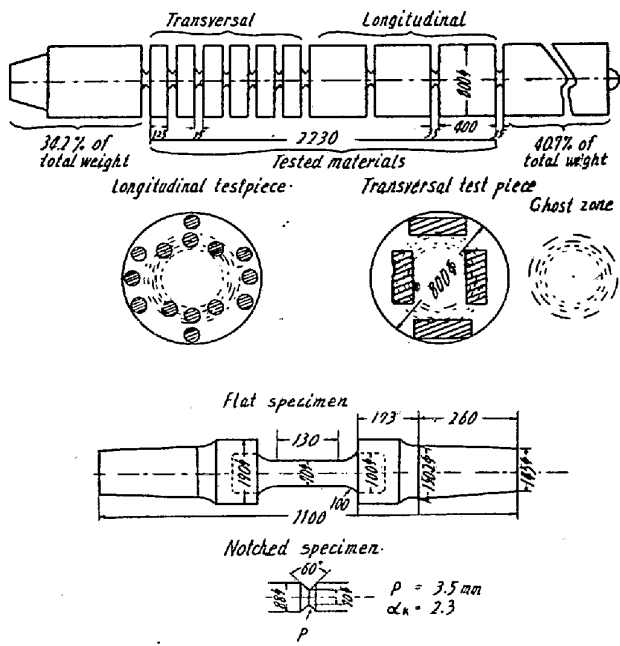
Sampling positions of test pieces and size of large size fatigue-test specimens.
